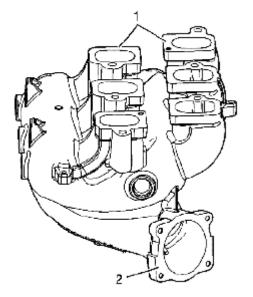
Inspecting Upper Intake Manifold Courtesy of SUZUKI OF AMERICA CORP.
